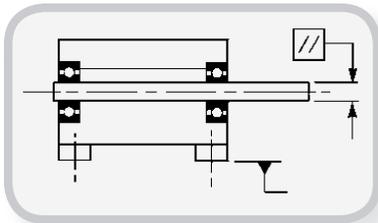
Parallelism of shaft axis to mounting datum
